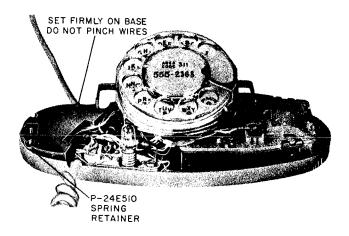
Location of P-24E510 Spring Retainer and P-15E719 Weight
